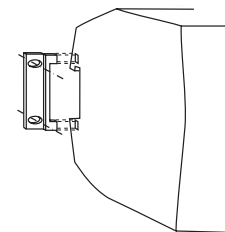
Wall mounting brackets HZZ00618-G (UMB- W)
